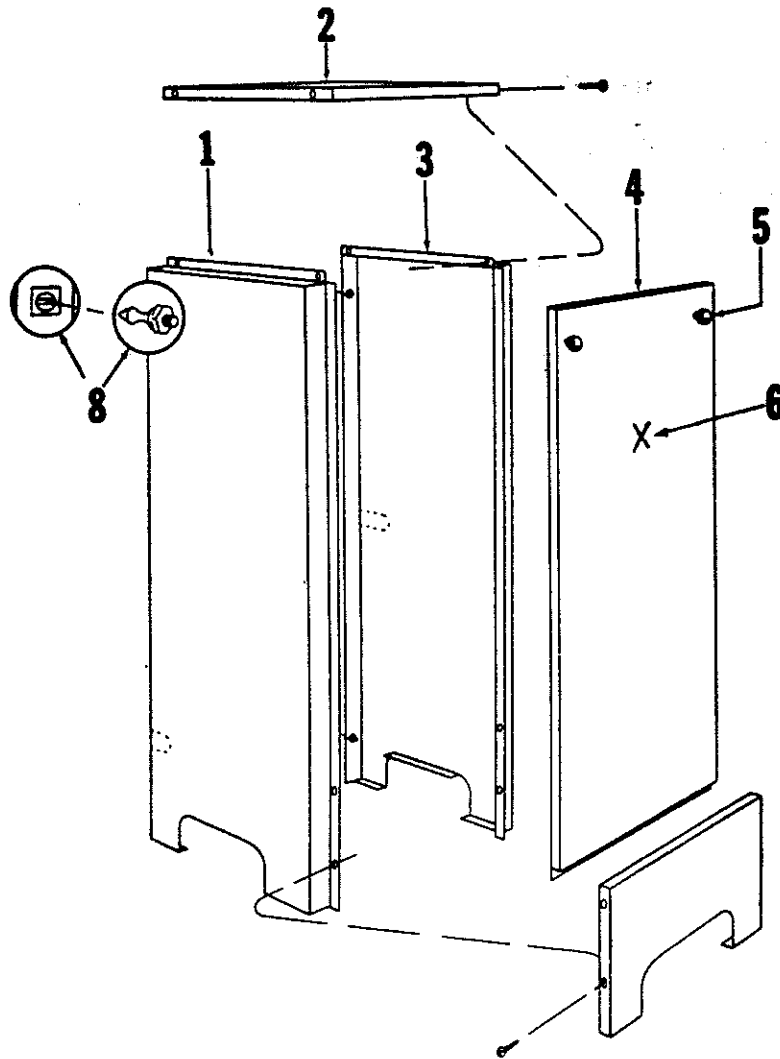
BOILER PARTS FOR ALL BOILERS
